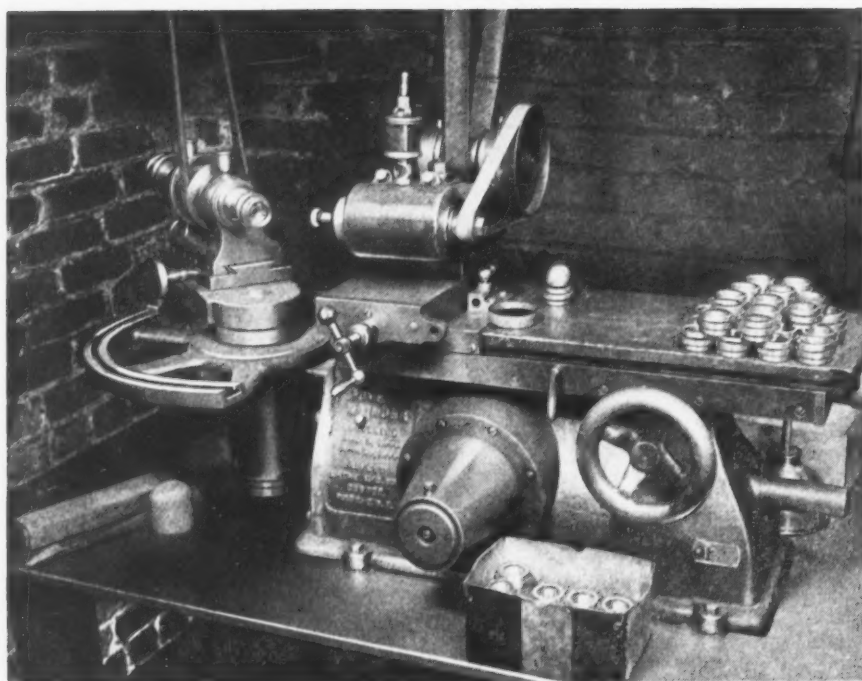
Equipment Employed for Grinding a Combination of Concave and Convex Surfaces in Both Faces of the Valve Seats
